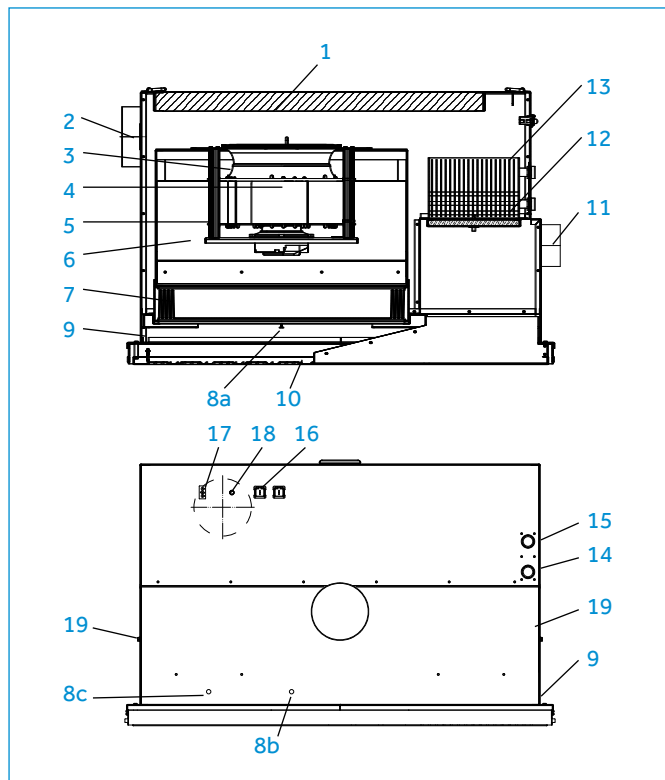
PIFF module with air grill 10, ceiling installation frame 9 and Prefilter 12: construction
